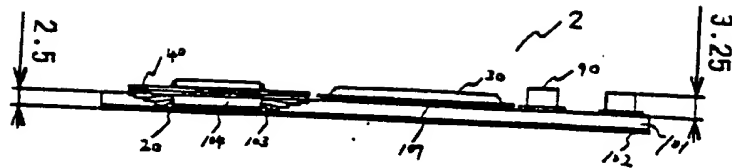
Drawing showing a CPU module wherein a chip size package processor is provided.
